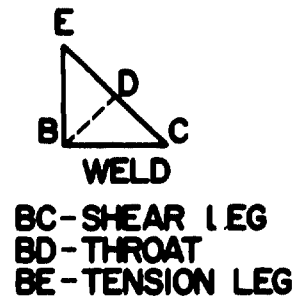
FILLET WELD MODEL DIMENSIONS
